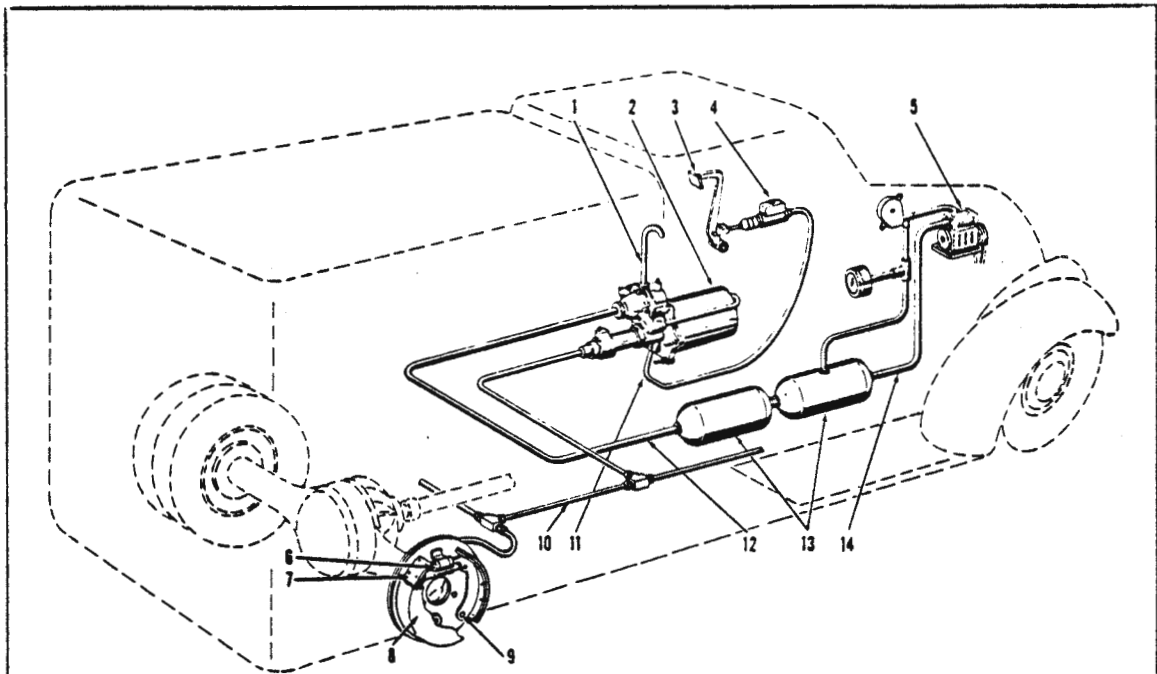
Air Over Hydraulic Power Brake System Equipped for Towing
